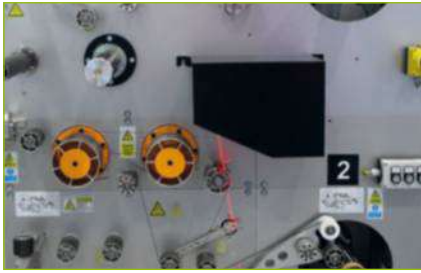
Quality Control System with In-Process Layout Inspection System (IPLIS)
